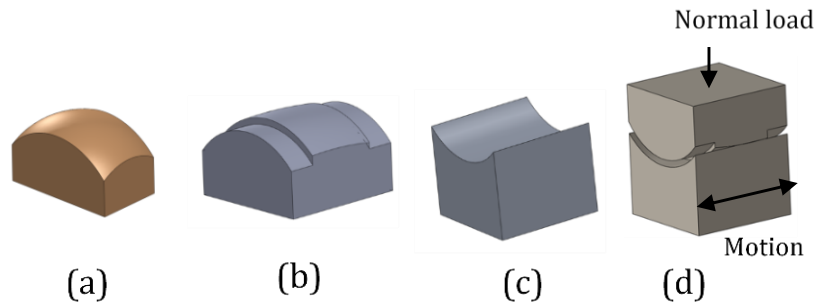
Fretting samples (a) upper stationary pin sample G1, (b) upper stationary pin sample G2, (c) lower oscillatory ring sample, and (d) the pair in contact when G2 is tested.
